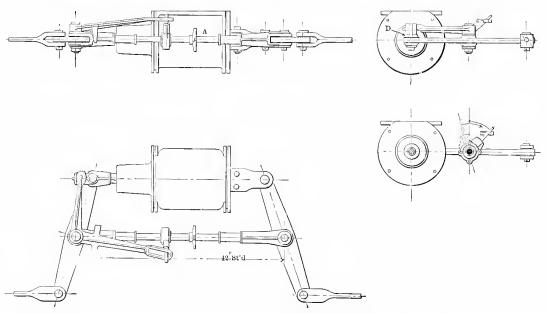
Creco Slack Adjuster for Passenger Train Cars. Chicago Railway Equipment Company.
